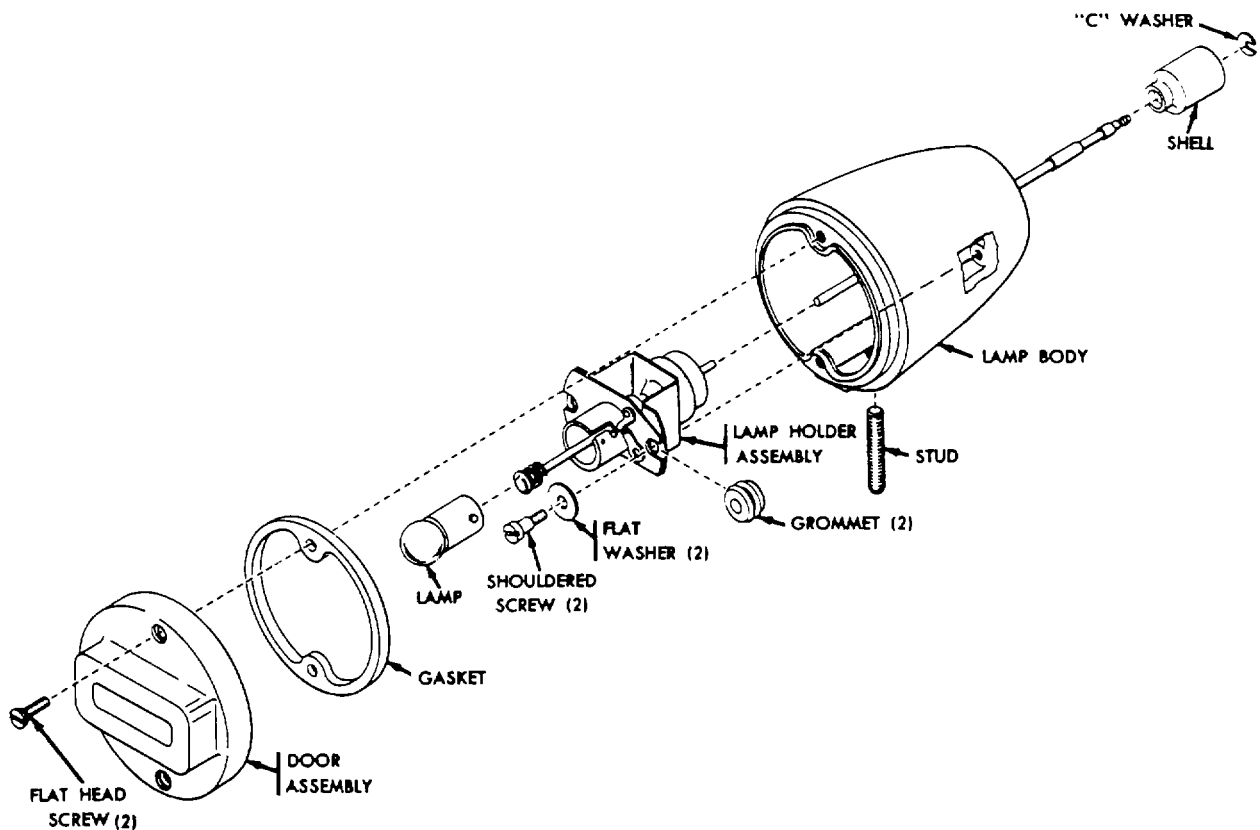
Disassembly of Blackout Marker Lamp Assembly
